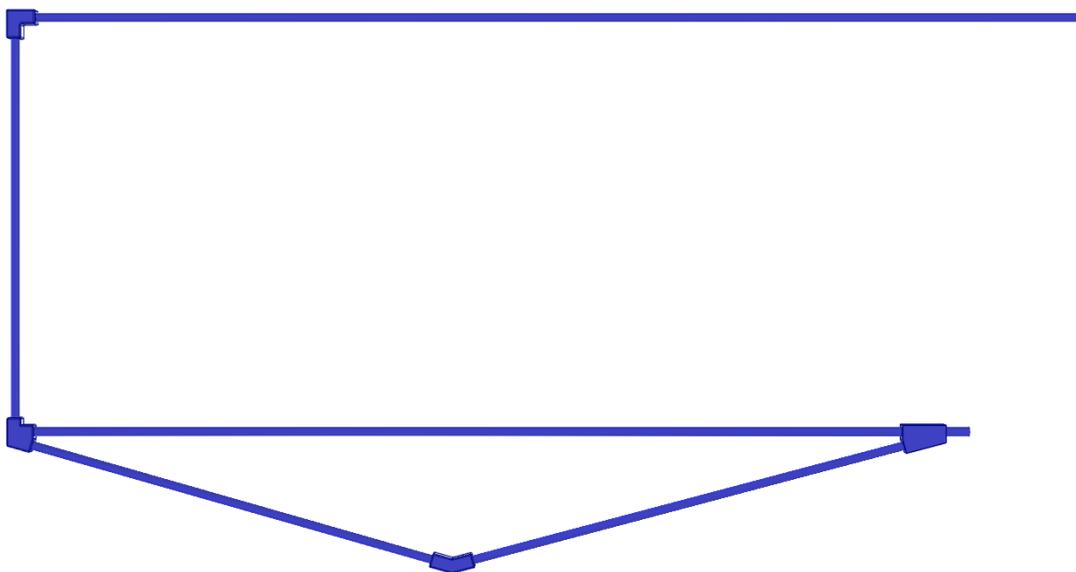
View of one part of the assemblies in one frame with different types of tubes and connectors
